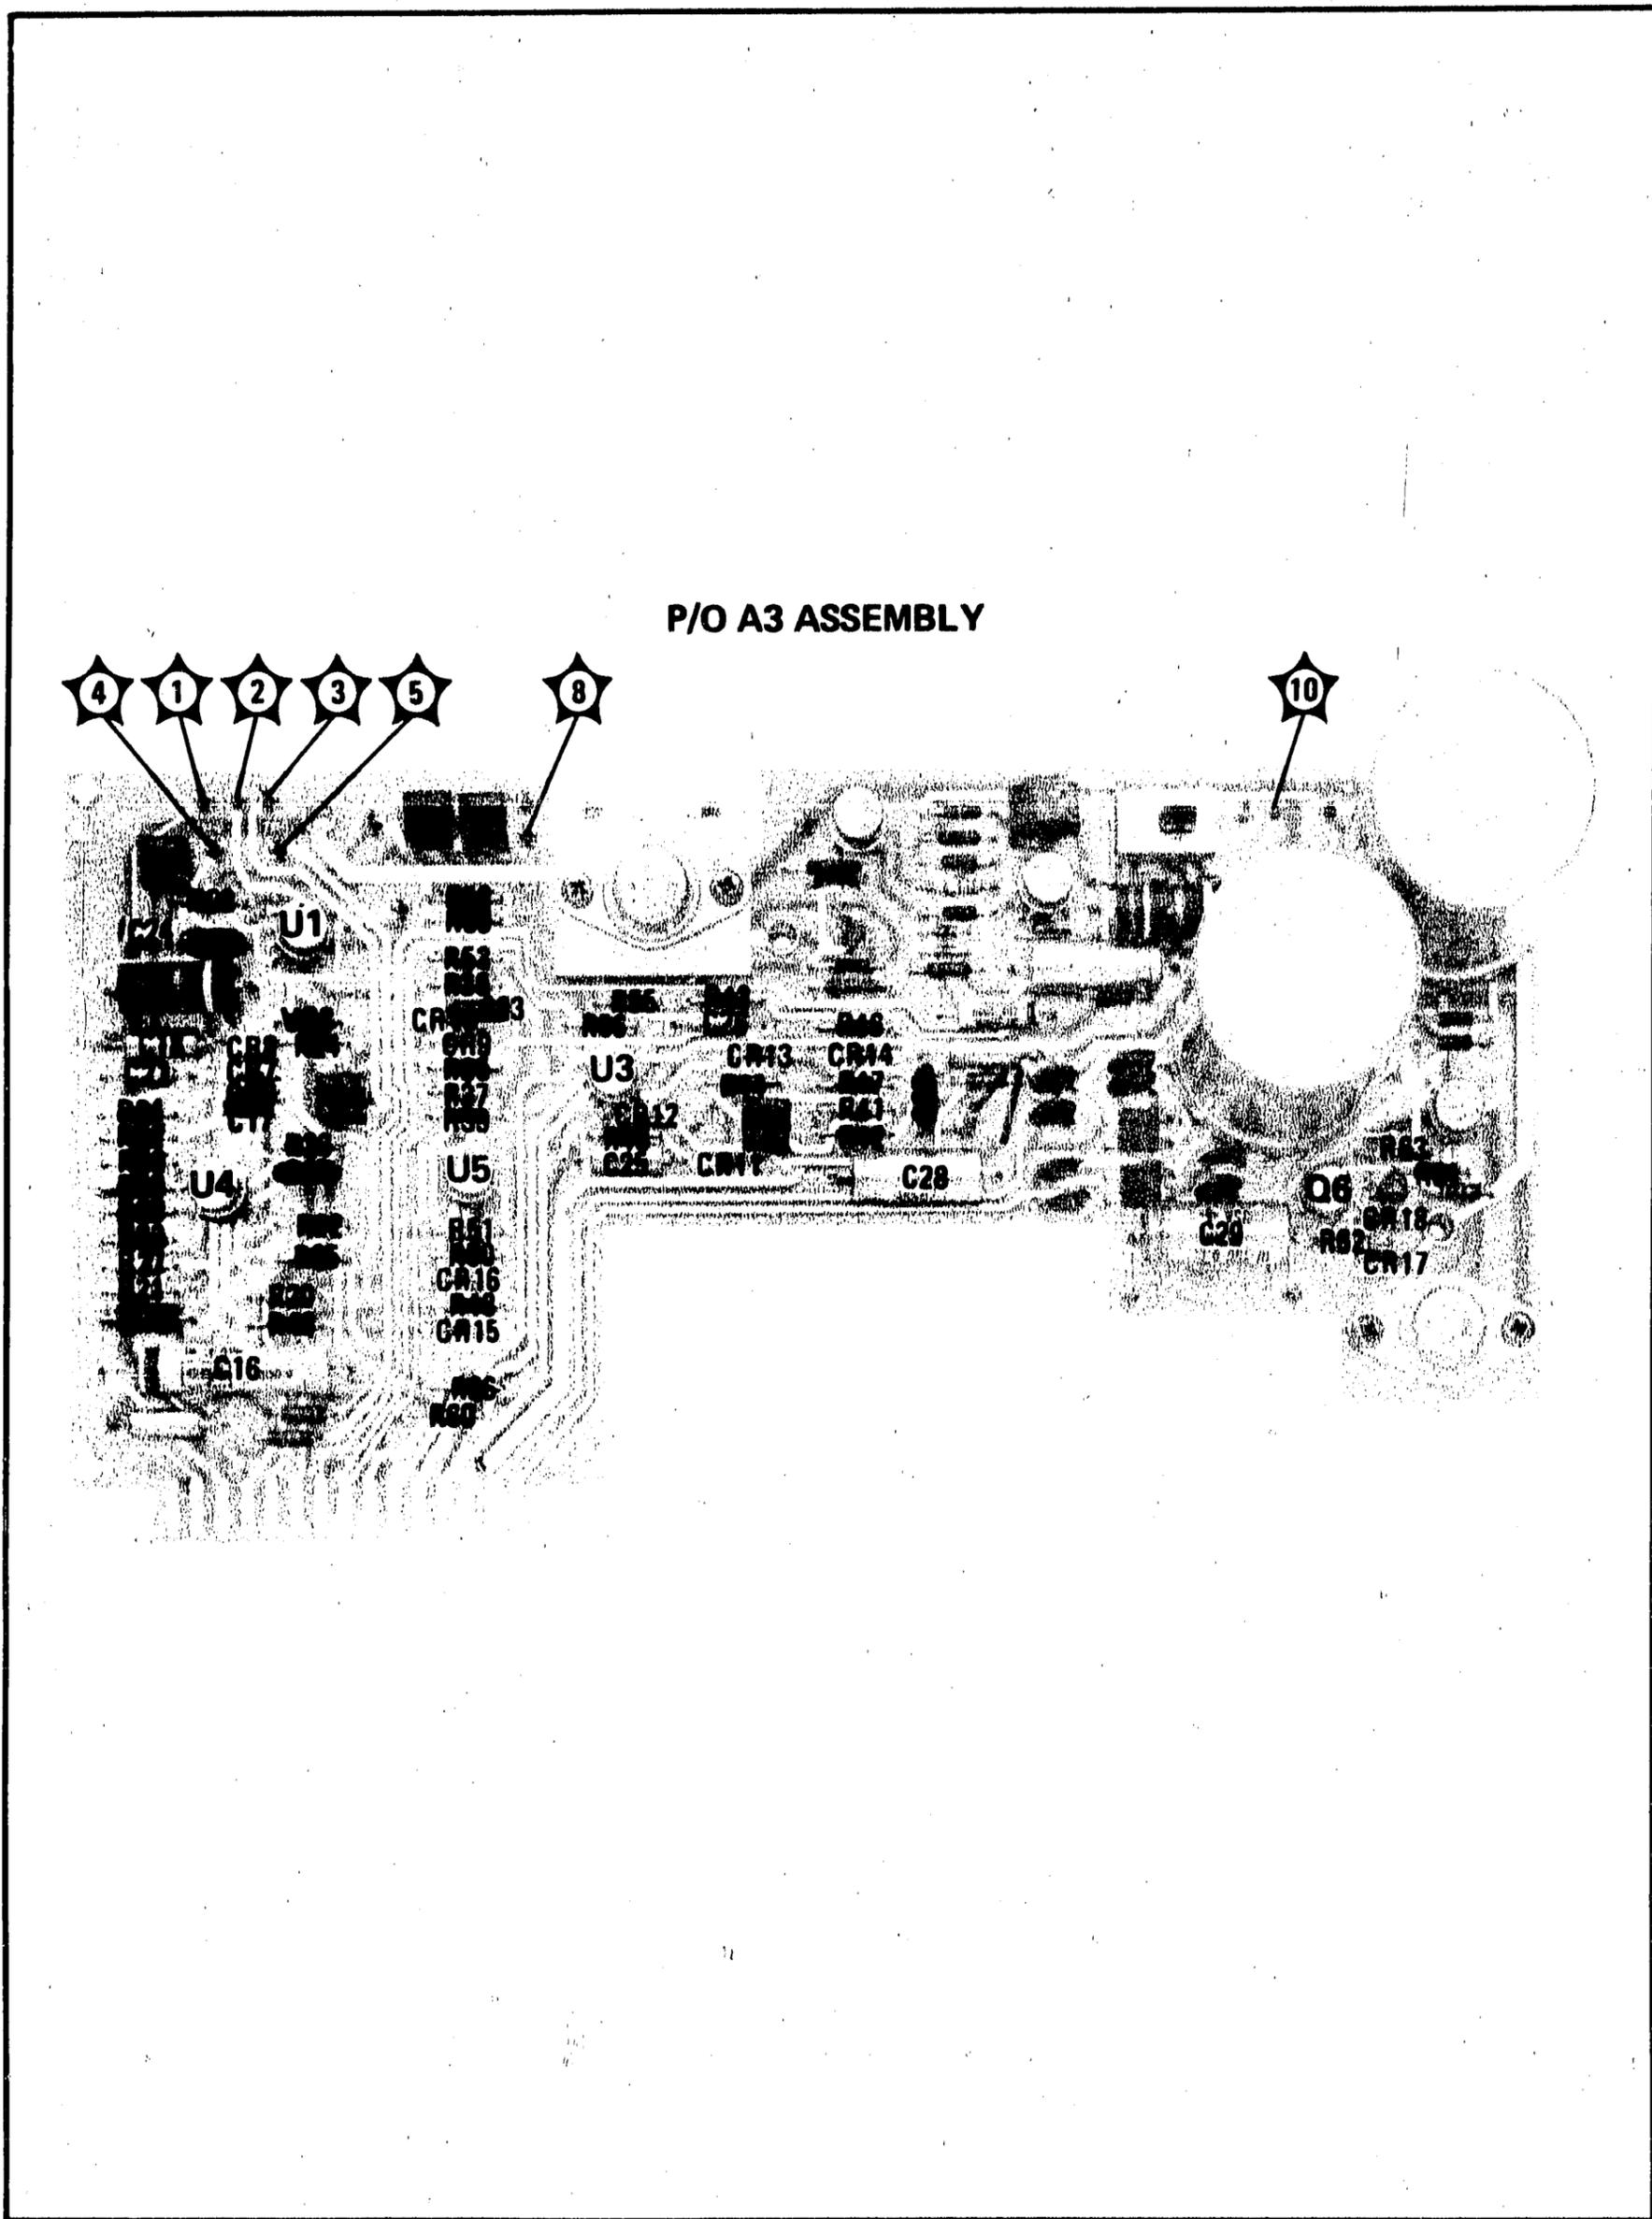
P/O A3 Control/Power Supply Board Assembly Component Locations
